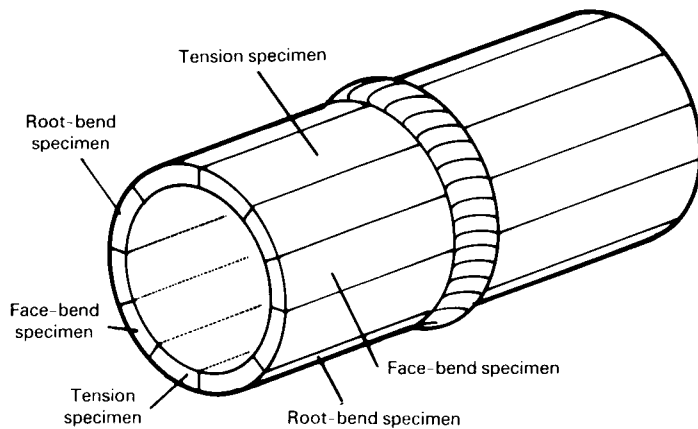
Typical location of test specimens from groove welds in butt-joint pipe test
